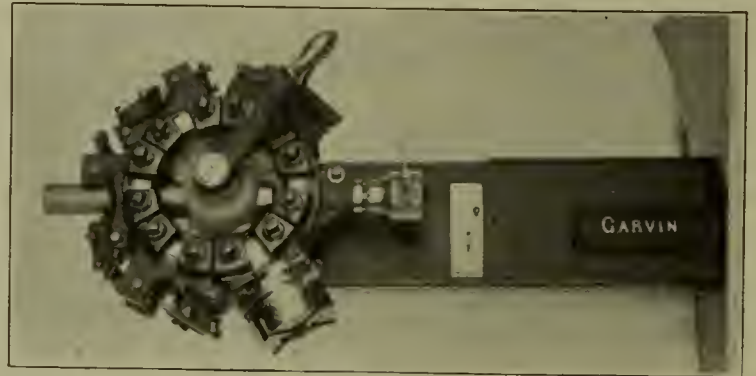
UNIVERSAL SCREW MACHINE—TURRET WITH FULL COMPLEMENT OF TOOLS.
